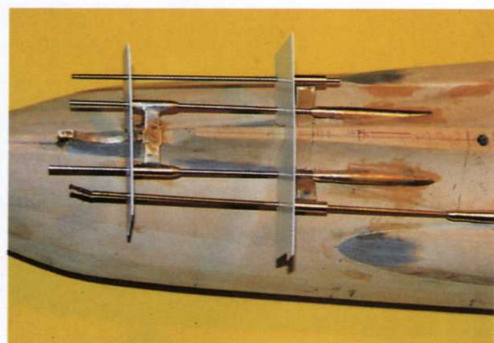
Propeller shaft jigs to maintain alignment whilst fixing the shafts and tubes into the hull.
